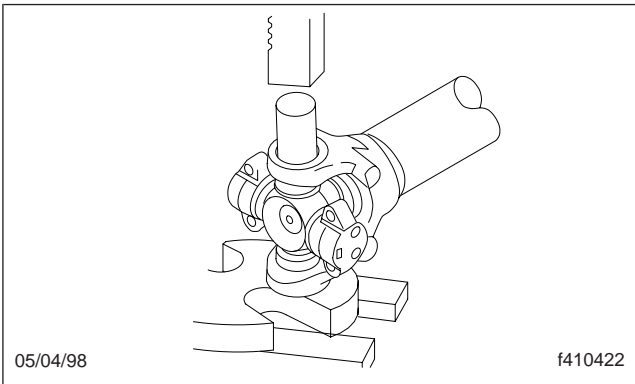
, Installing Bearing Cups, RPL Series U-Joint
